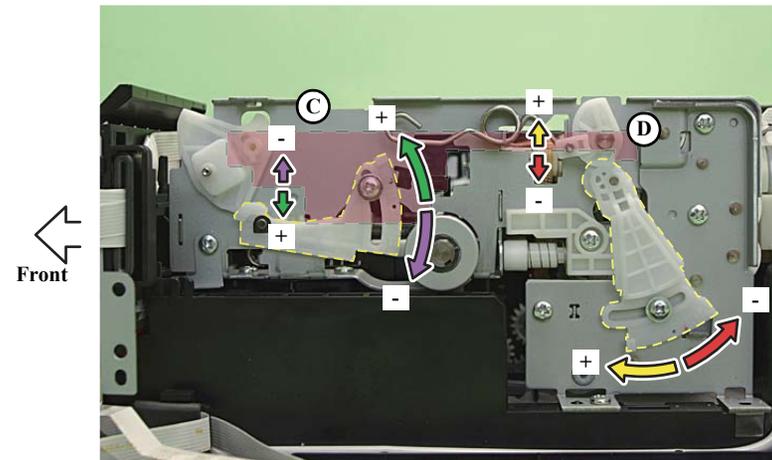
Operating the parallelism adjustment bushing (Right side)
